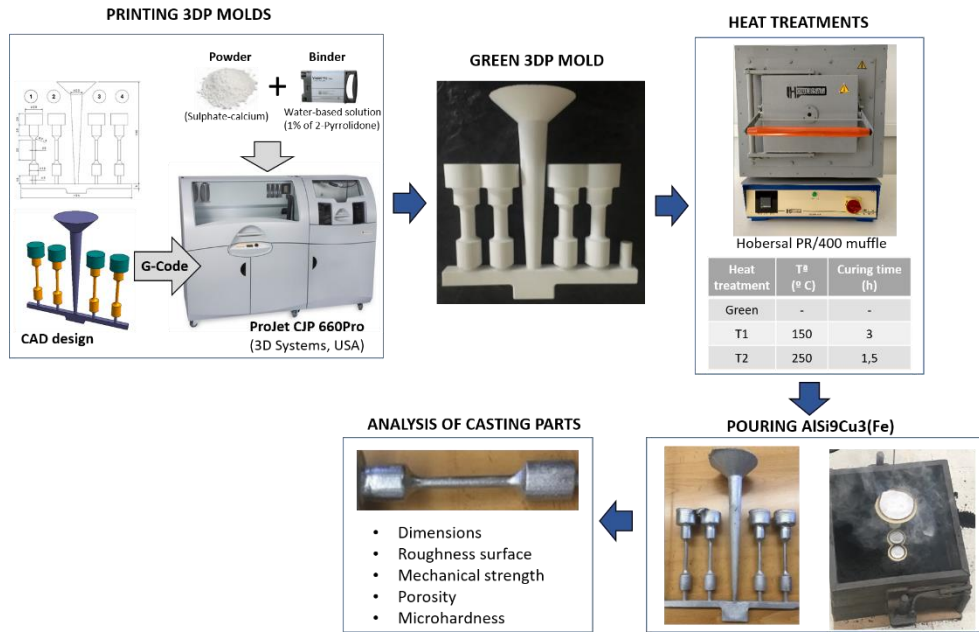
Process sequence for 3D printing the mold and manufacturing the tensile test castings.
